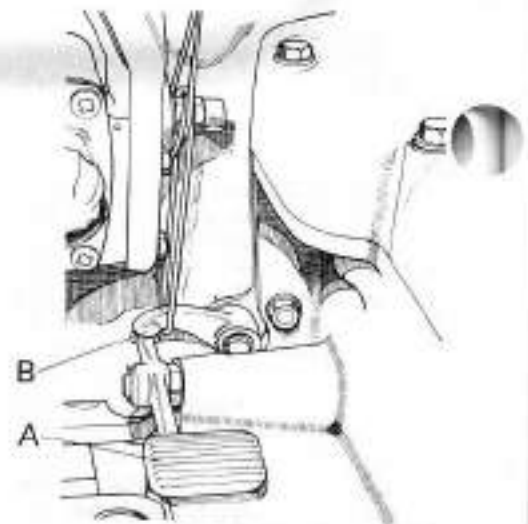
To retain locking sleeve in differential end plate, thus allowing removal or installation of final drive unit, depress pedal (A) to engage differential lock and wire arm (B) is engaged position.
